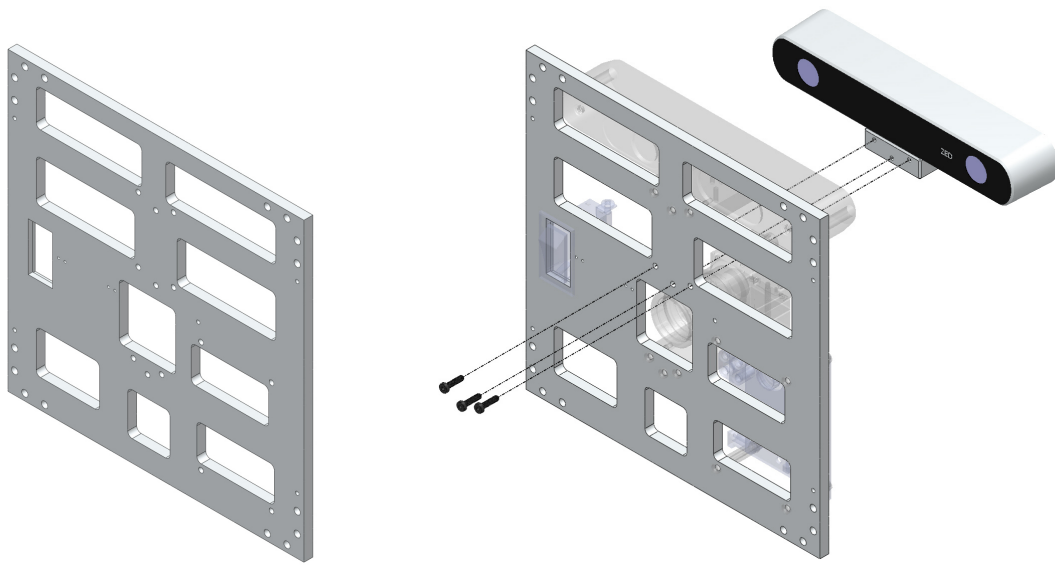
Isometric view of the sensor mounting plate (left); mounting of the ZED camera to the sensor mounting plate (right).
